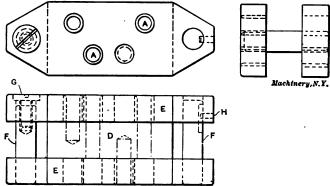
Simplest Form of Closed Jig for Drilling Work in Fig. 83
